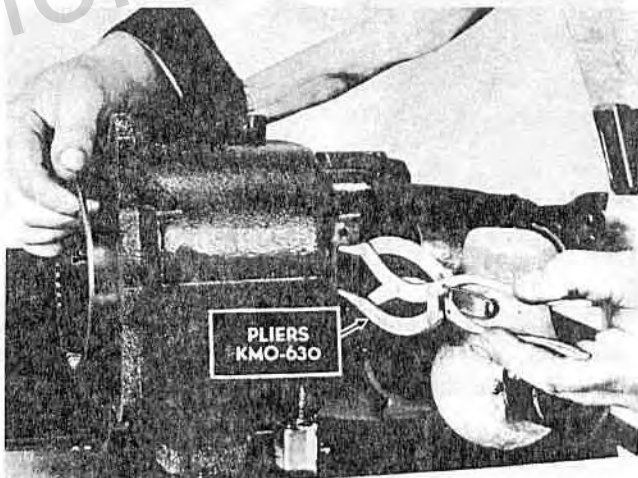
Spreading the Overdrive Mainshaft Bearing Snap Ring
